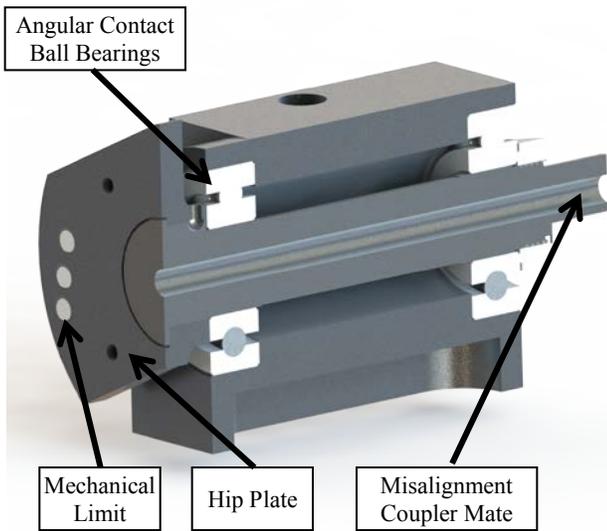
Differential bearing block with quasi-static kinematic coupling.
